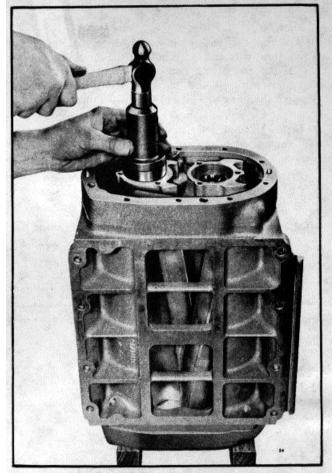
Installing Roller Bearing on Rotor Shaft and in Front End Plate using Tool J 6270-4.
